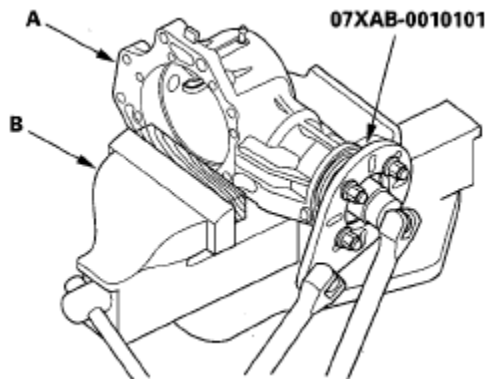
Identifying Transfer Housing In Bench Vise With Companion Flange Holder
